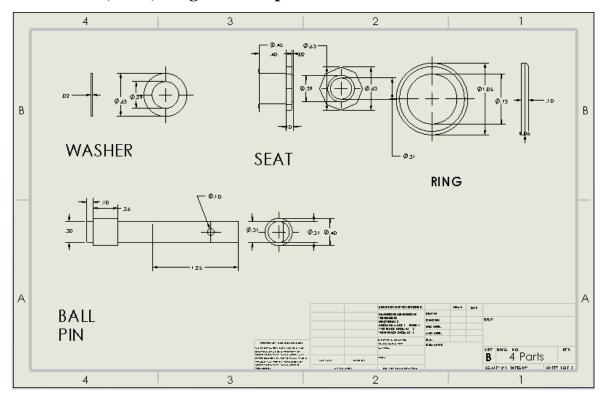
2-Dimensional Sketch of Washer, Seat, Ring and Ball Pin
